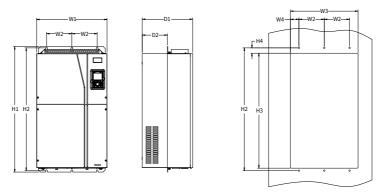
Flange mounting dimensions and hole spacings for VFDs of 380V 132–200kW
